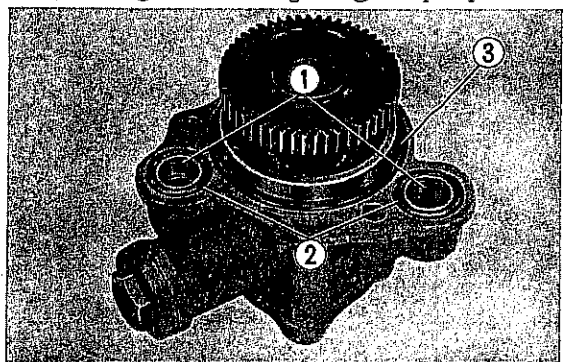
① O-ring collar ② 14 mm O-ring ③ 47 mm O-ring
